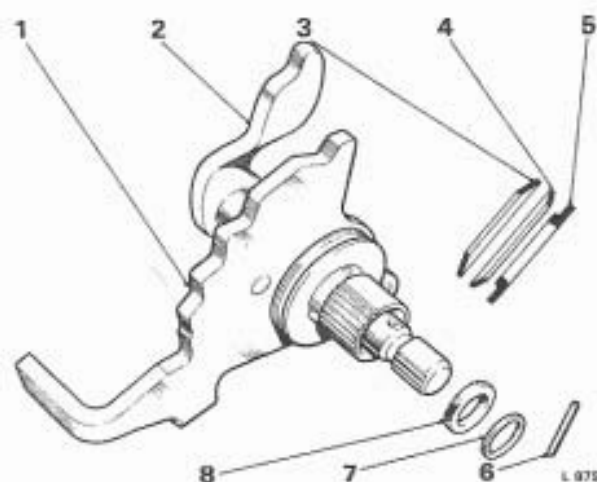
SELECTOR AND THROTTLE VALVE LEVERS
